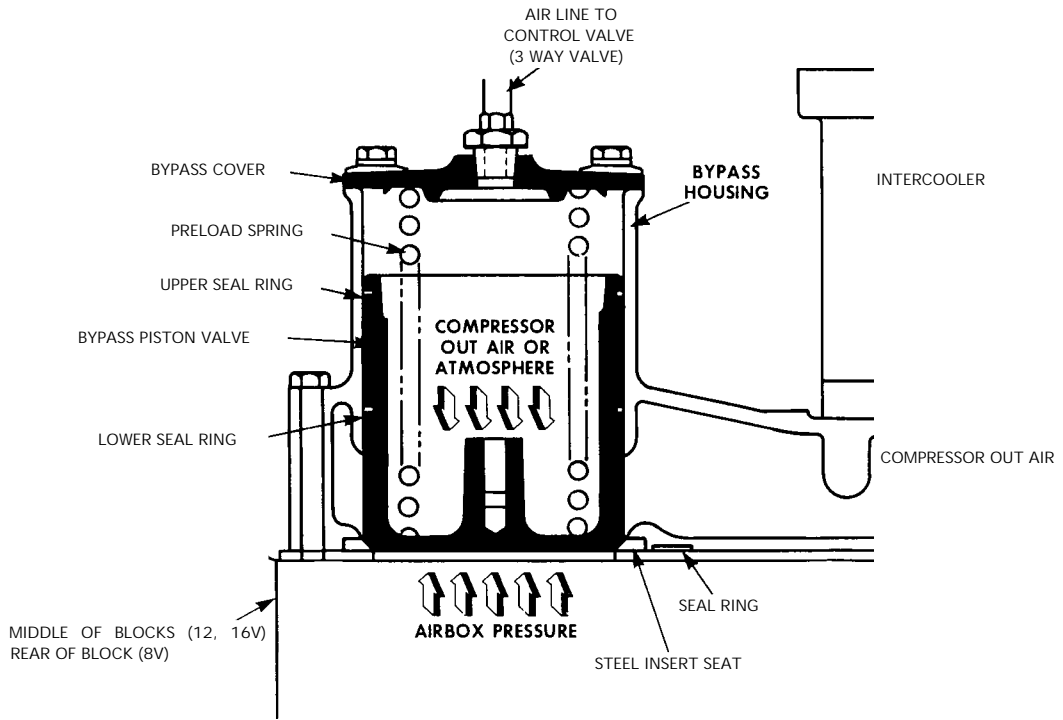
Piston Style Blower Bypass Valve Assembly
